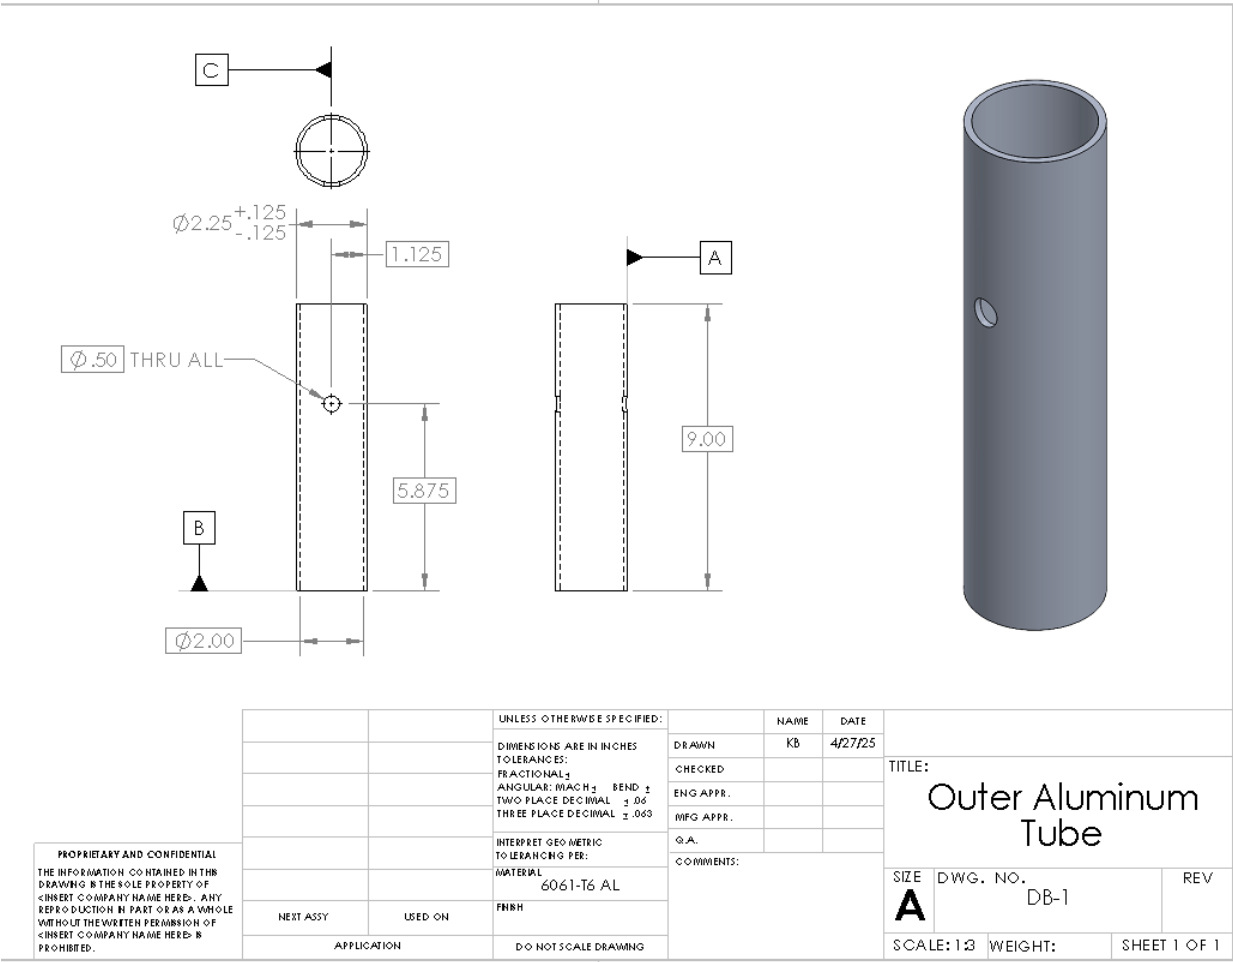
Outer Aluminum Tube ASME Y14.5 Compliant Drawing
